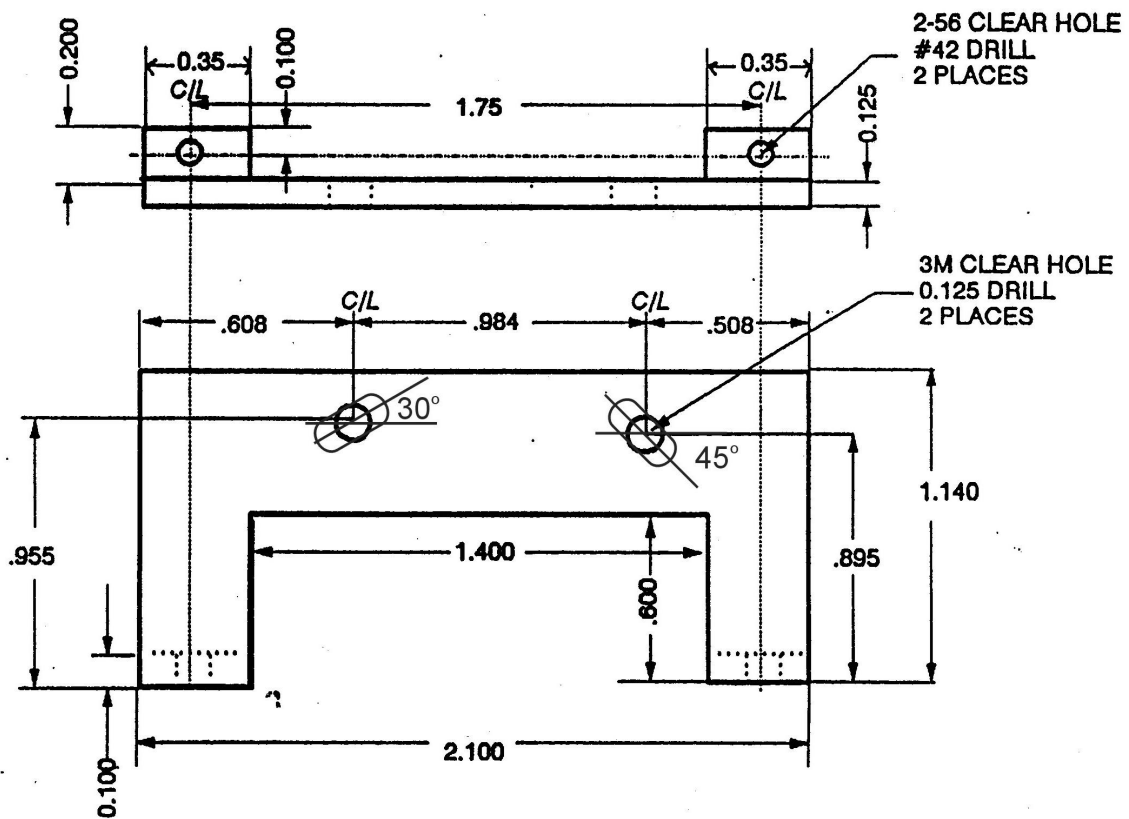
Front mounting bracket, number (B) in Figure B.1. The clearance holes for the translation stages are extended by \pm half the diameter of the hole at angles of 30° and 45° , respectively, to allow mounting the stages at a slight angle (5 - 10 degrees off the horizontal), so the light of the laser does not shine perpendicular onto the sample. This avoids backscattering from reflective samples into the laser diode, which would destabilize the laser.
